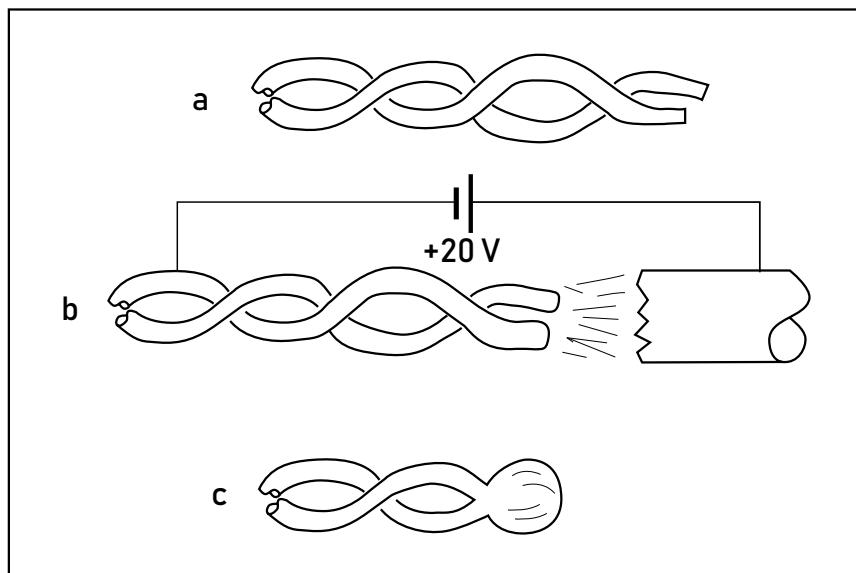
The process of welding fine wires to make thermocouples
